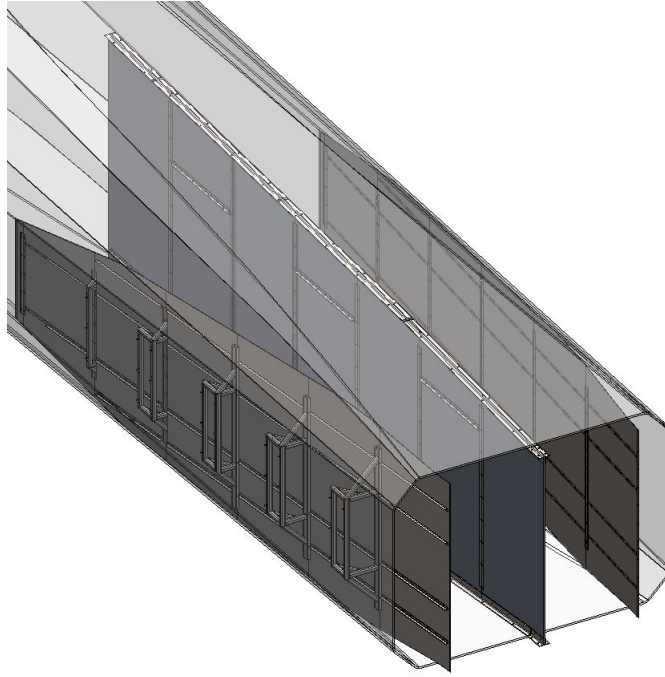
Full diffuser wall and splitter plate assembly in existing concrete diffuser
